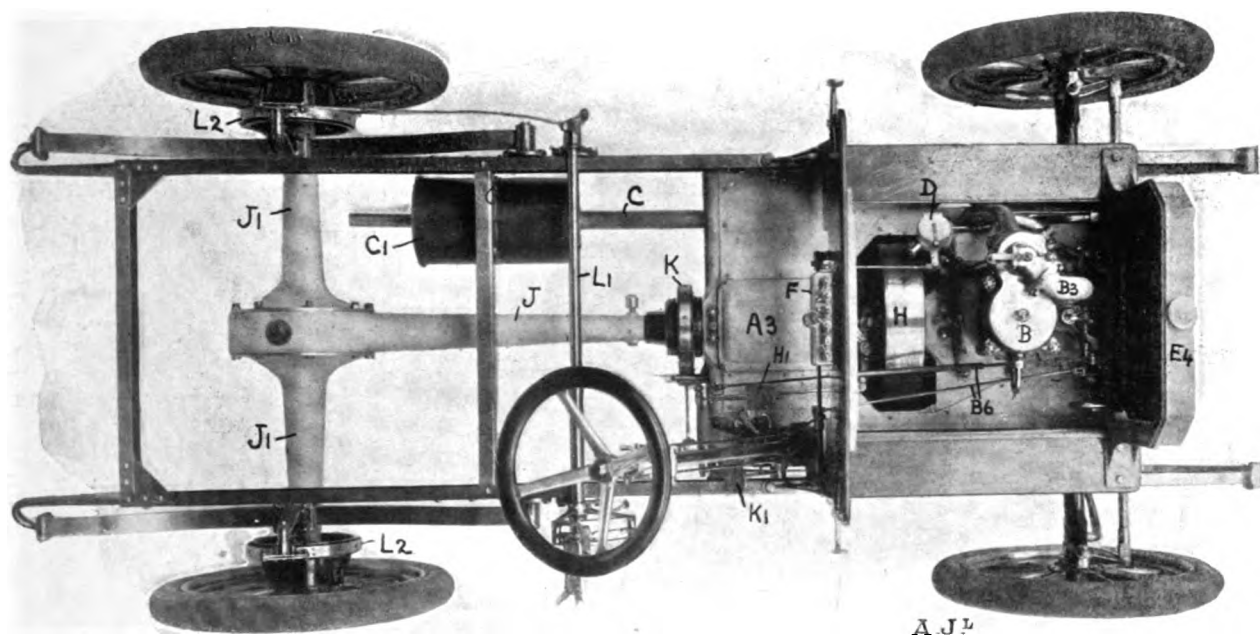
View of the 6-h.p. Siddeley Chassis, from above, showing the general arrangement of the Engine, Clutch, Gear-Box, and Live-Rear-Axle.
